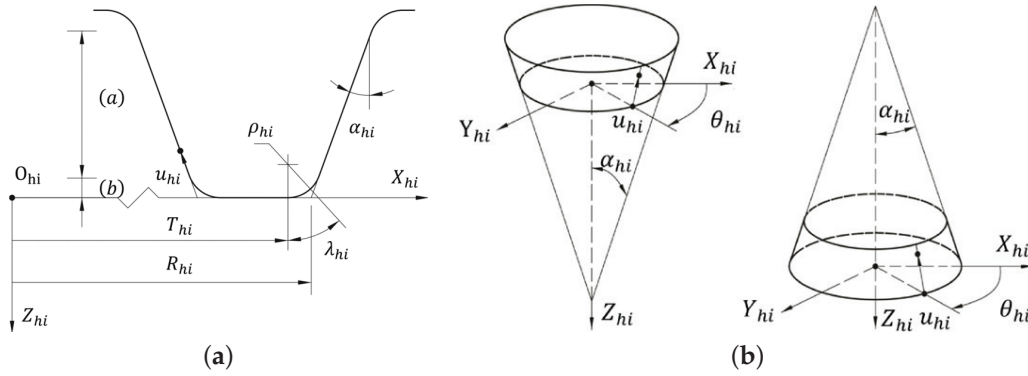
Head cutter blade and generating surface. (a) Head cutter composition; (b) concave side or outer blade.
